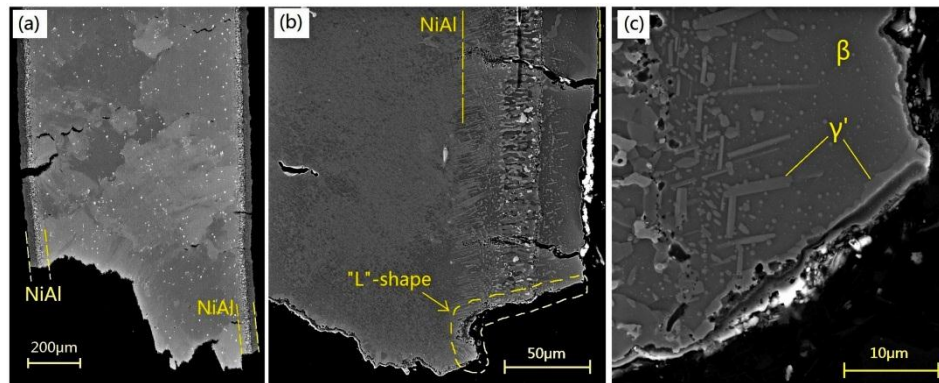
Fractured NiAl-NiAl sample for 850 °C: (a) morphology containing fracture surface, (b) “L”-shape path of through-coating cracks and (c)  $\gamma'$  precipitates in OZ. (The coating part is marked in Fig. 6-8).
